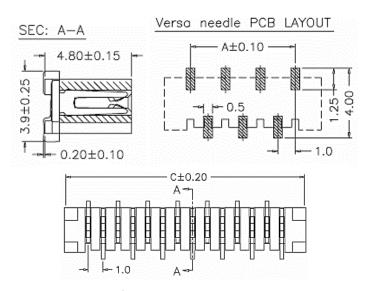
PCB flex connector FPC1.0mm dimensions
